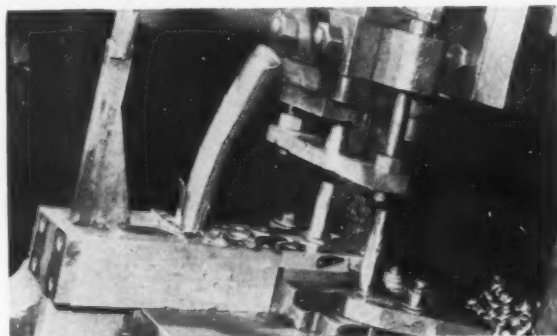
Rings stacked in magazine, center, for coining to smooth finish and close tolerance. A slide below the magazine feeds rings to carbide dies in an inclined press.
